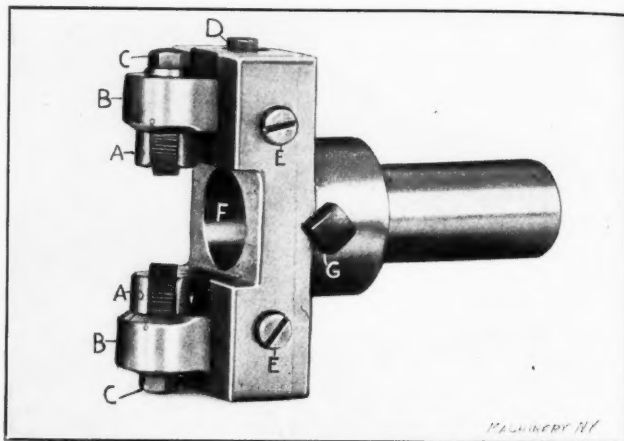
Brown & Sharpe Adjustable Turret Knurl-holder
